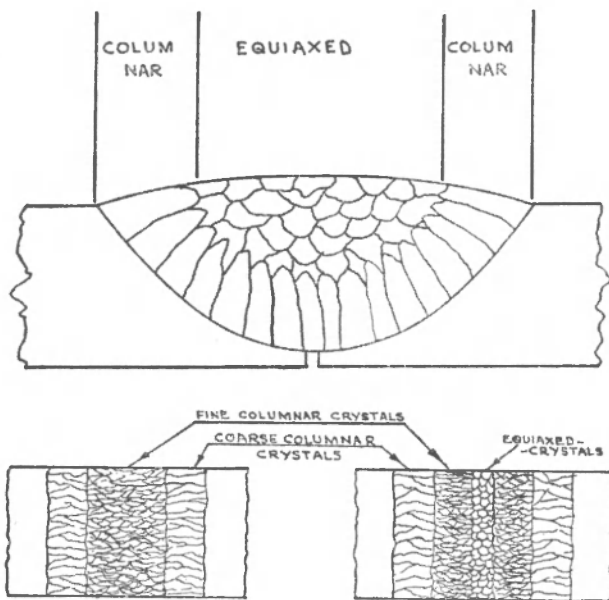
STRUCTURE OF THE WELD IN ELECTROSLAG WELDING DEPENDING ON COOLING RATE
